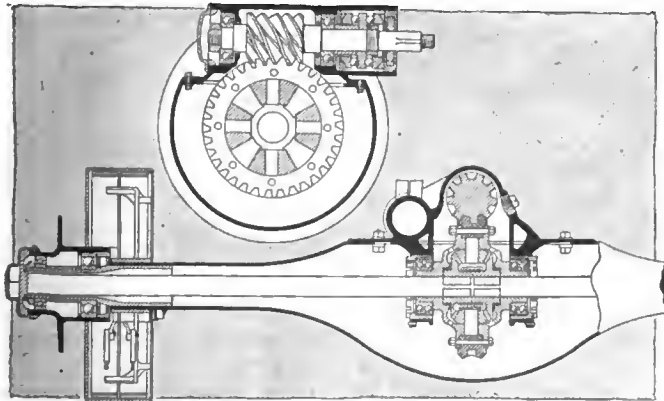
Hess overhead worm-drive axle, showing the details of the worm and gear mounting on annular and thrust ball bearings
